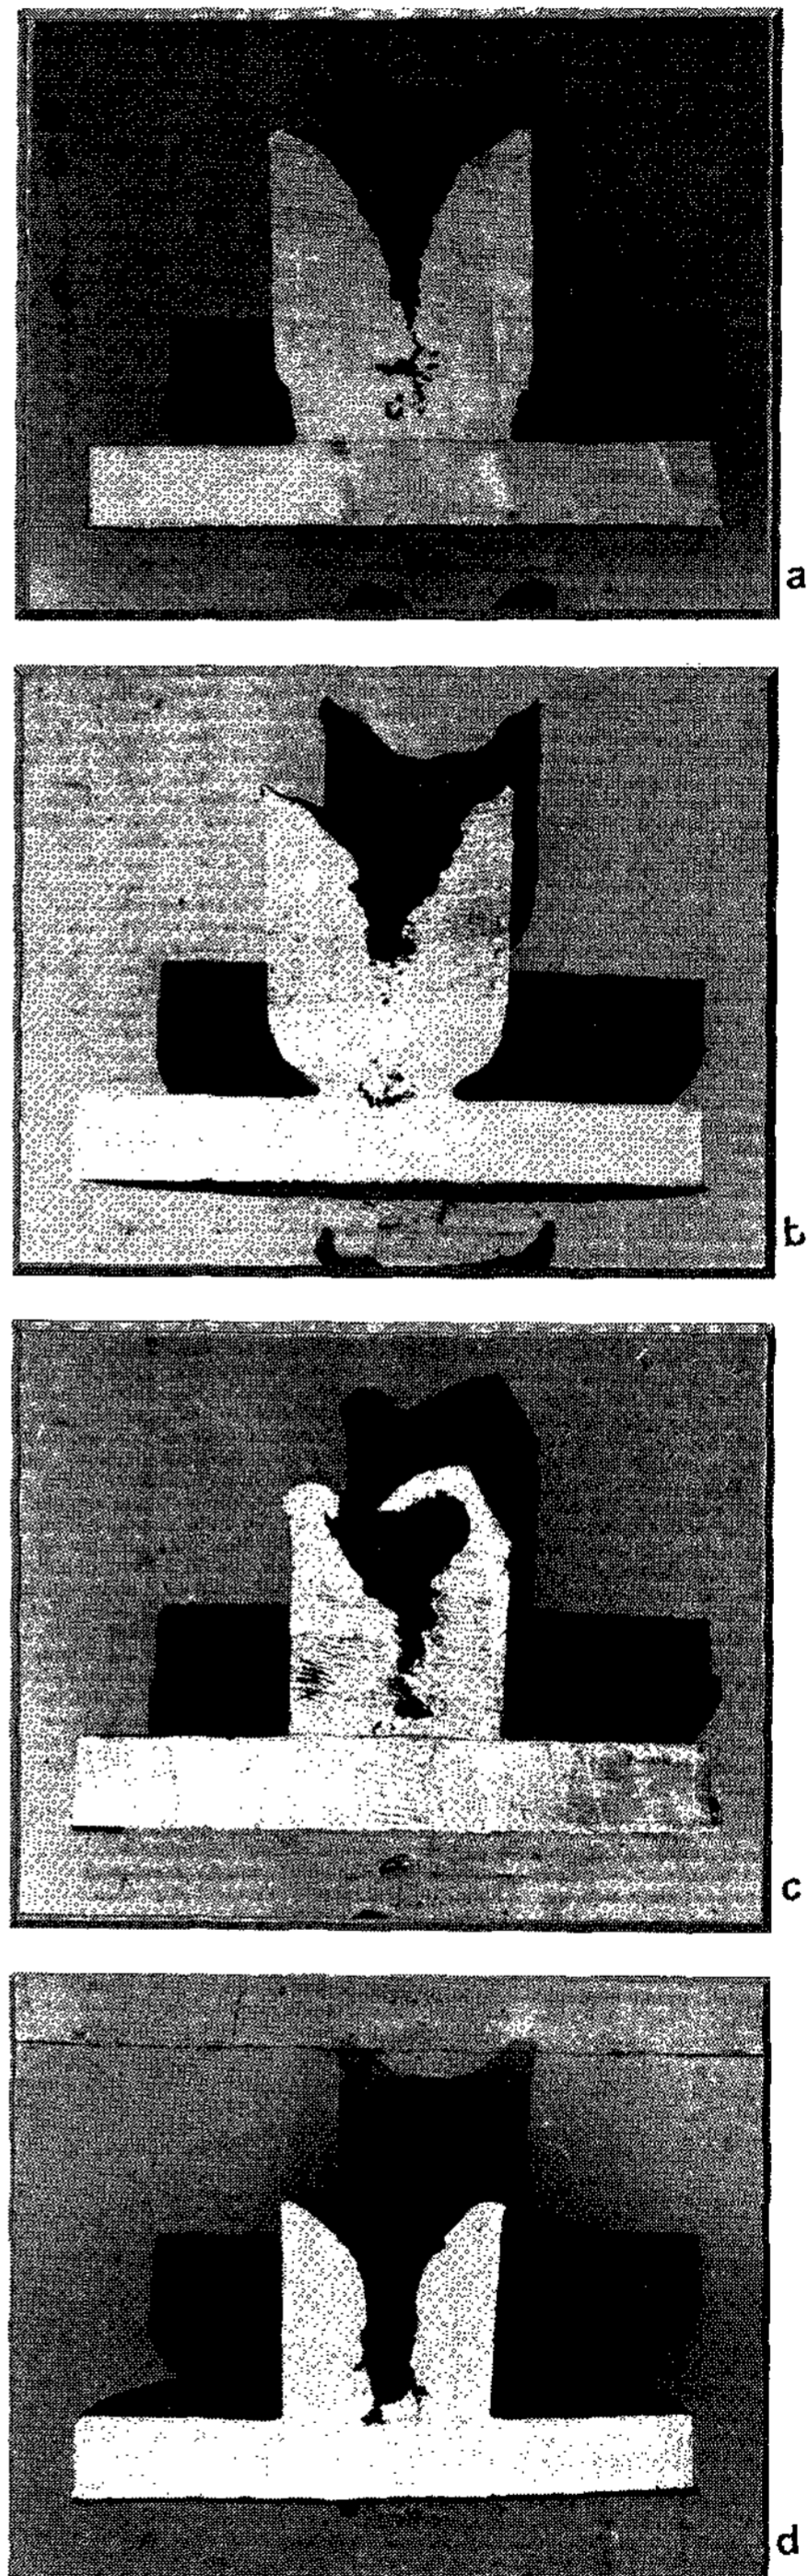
Formation of shrinkage cavities in disc shaped stainless steel castings solidified in a sand mold; (a) Johns ①, (b) Johns ②, (c) Pellini, and (d) Obata method.
